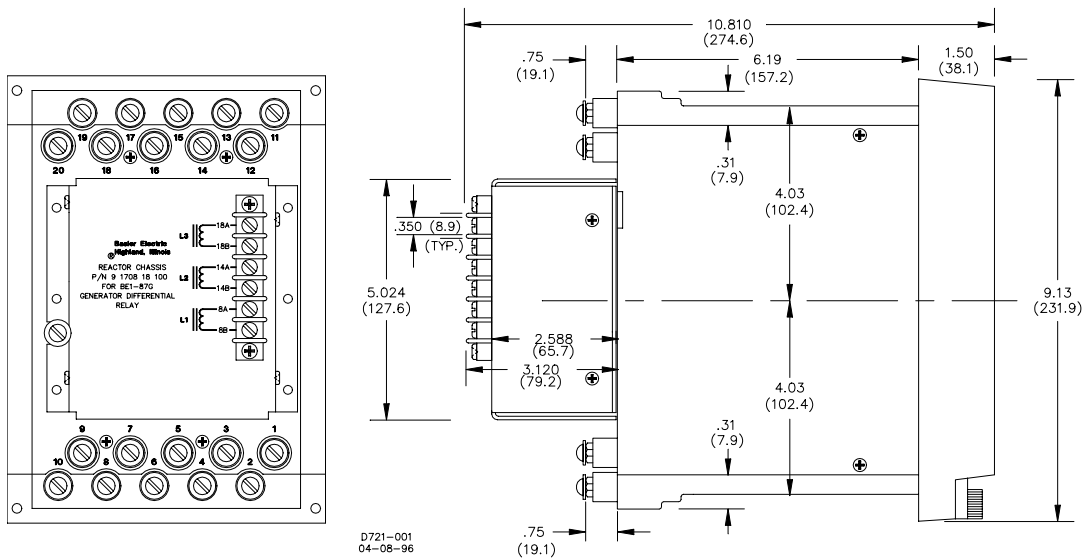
S1 Case And Reactor, Outline Dimensions (Semi-Flush Mounting)
